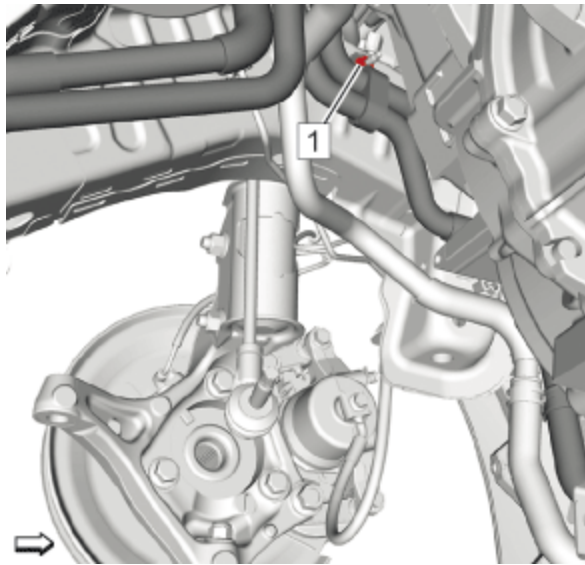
Drive Motor Generator Control Module Cooling Outlet Hose And Nut
